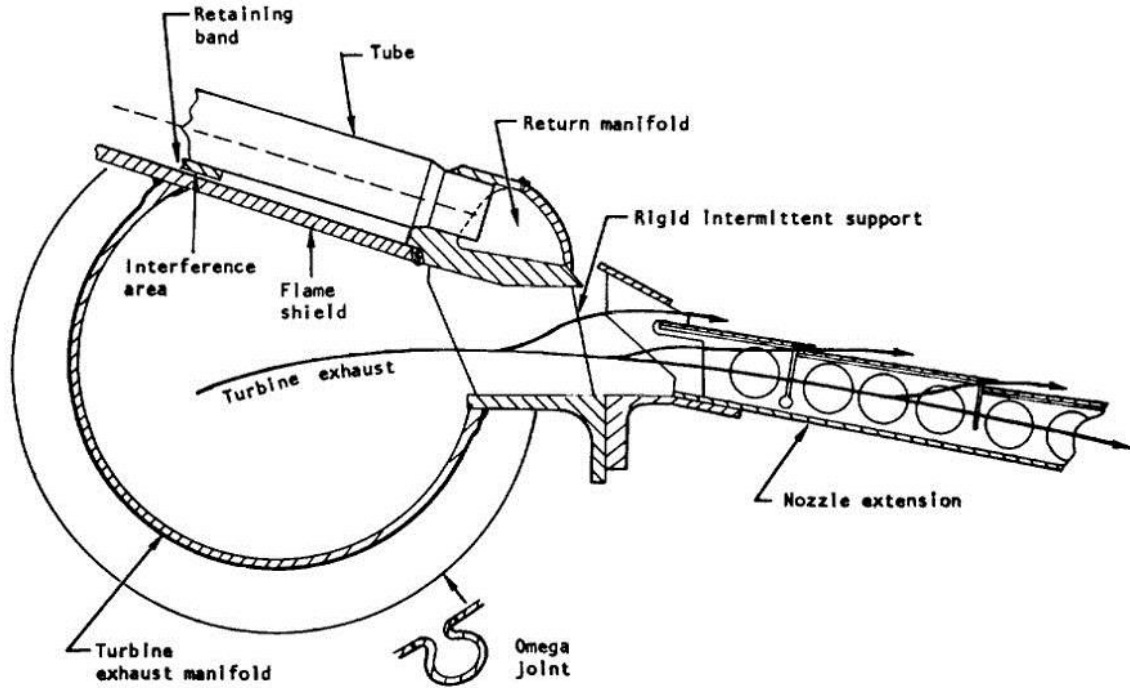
F-1 engine turbine exhaust manifold and nozzle extension film injection [46].
